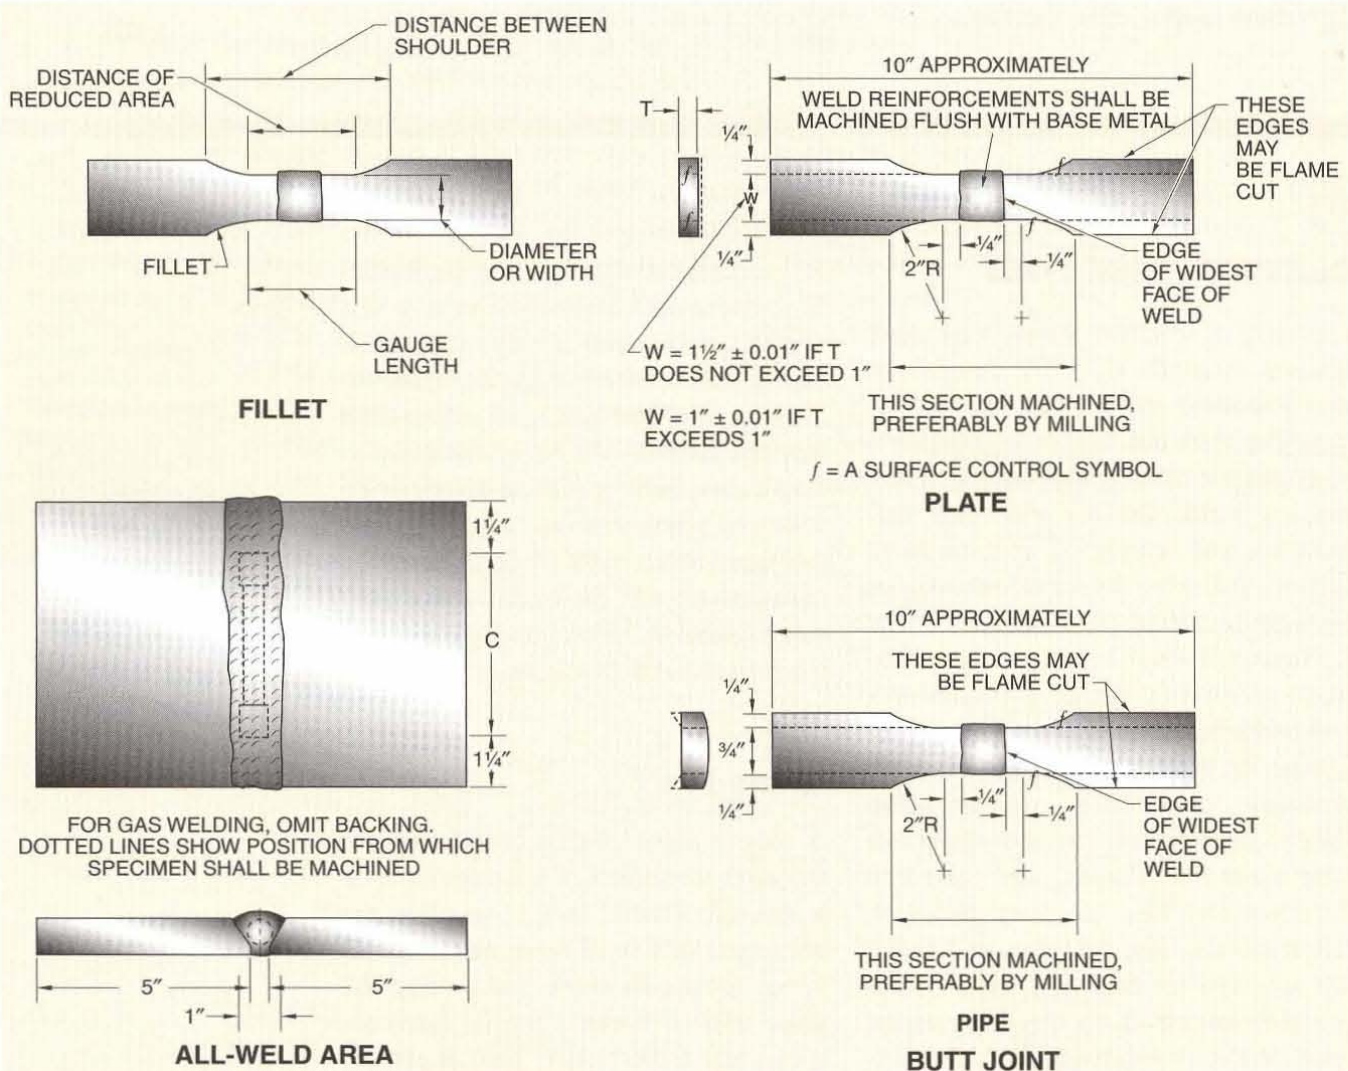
A fillet is used on the tensile test specimen to remove stress concentrations. Specimens for all-weld areas must conform to specific dimensions. Butt welds are used for tensile tests on plate and pipe.
